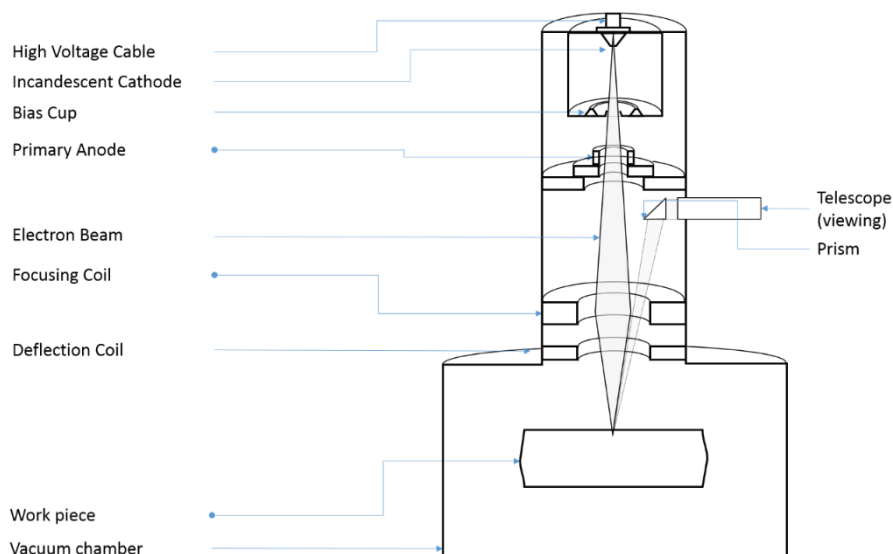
EBM technology showing schematic architecture of inner machine chambers
